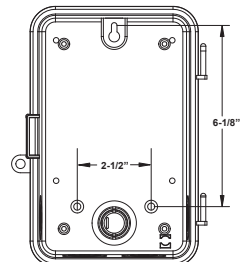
Rear View of Enclosure with mounting hole dimensions
